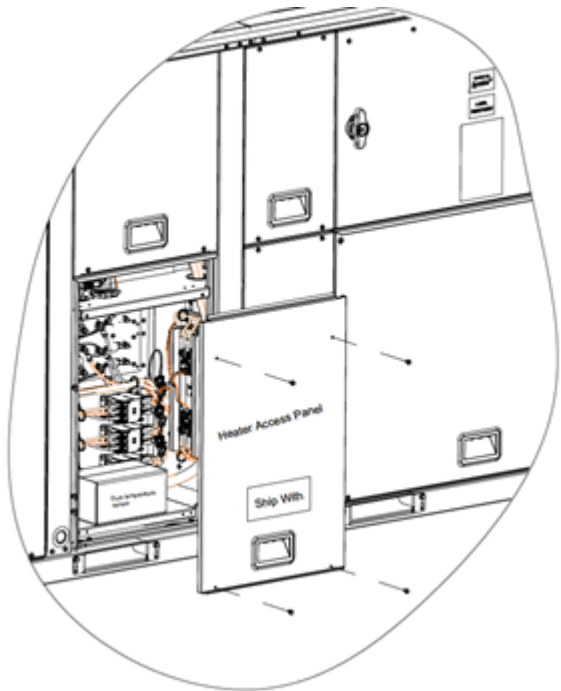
Supply duct-mounted sensor harness WIRHEH0451
